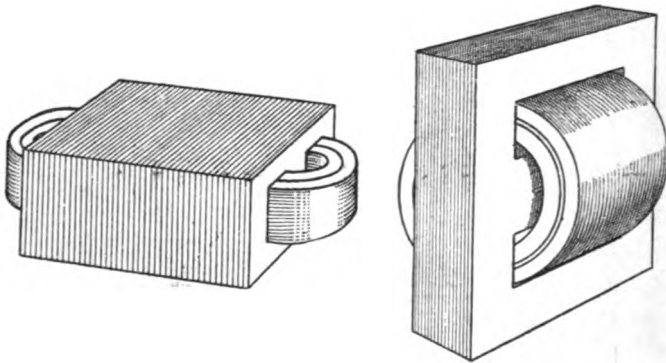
SHELL-TYPE TRANSFORMER, with elongated coils. FIG. 402.—SHELL-TYPE TRANSFORMER, with coaxial cylindrical coils.
